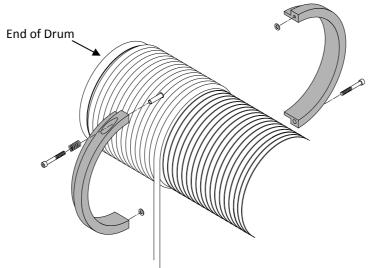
Fitting Top and Bottom Halves of Rope Guide Inner Band
